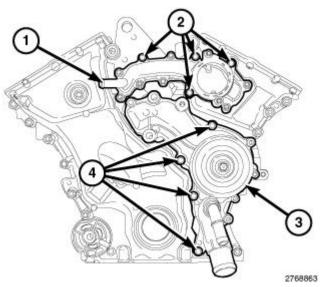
Coolant Outlet Housing, Water Pump & Bolts Courtesy of CHRYSLER GROUP, LLC
